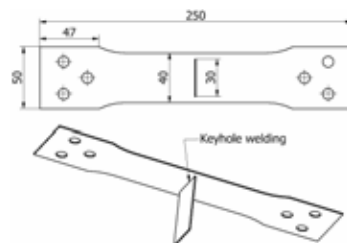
The geometry of the laser welded specimen in AISI 304.
